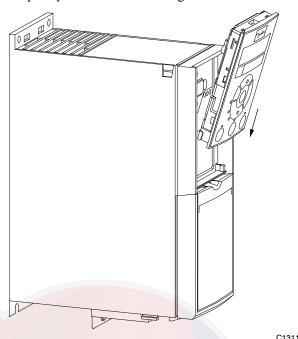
Align Bottom of VFD Keypad with Opening in VFD Front Panel
